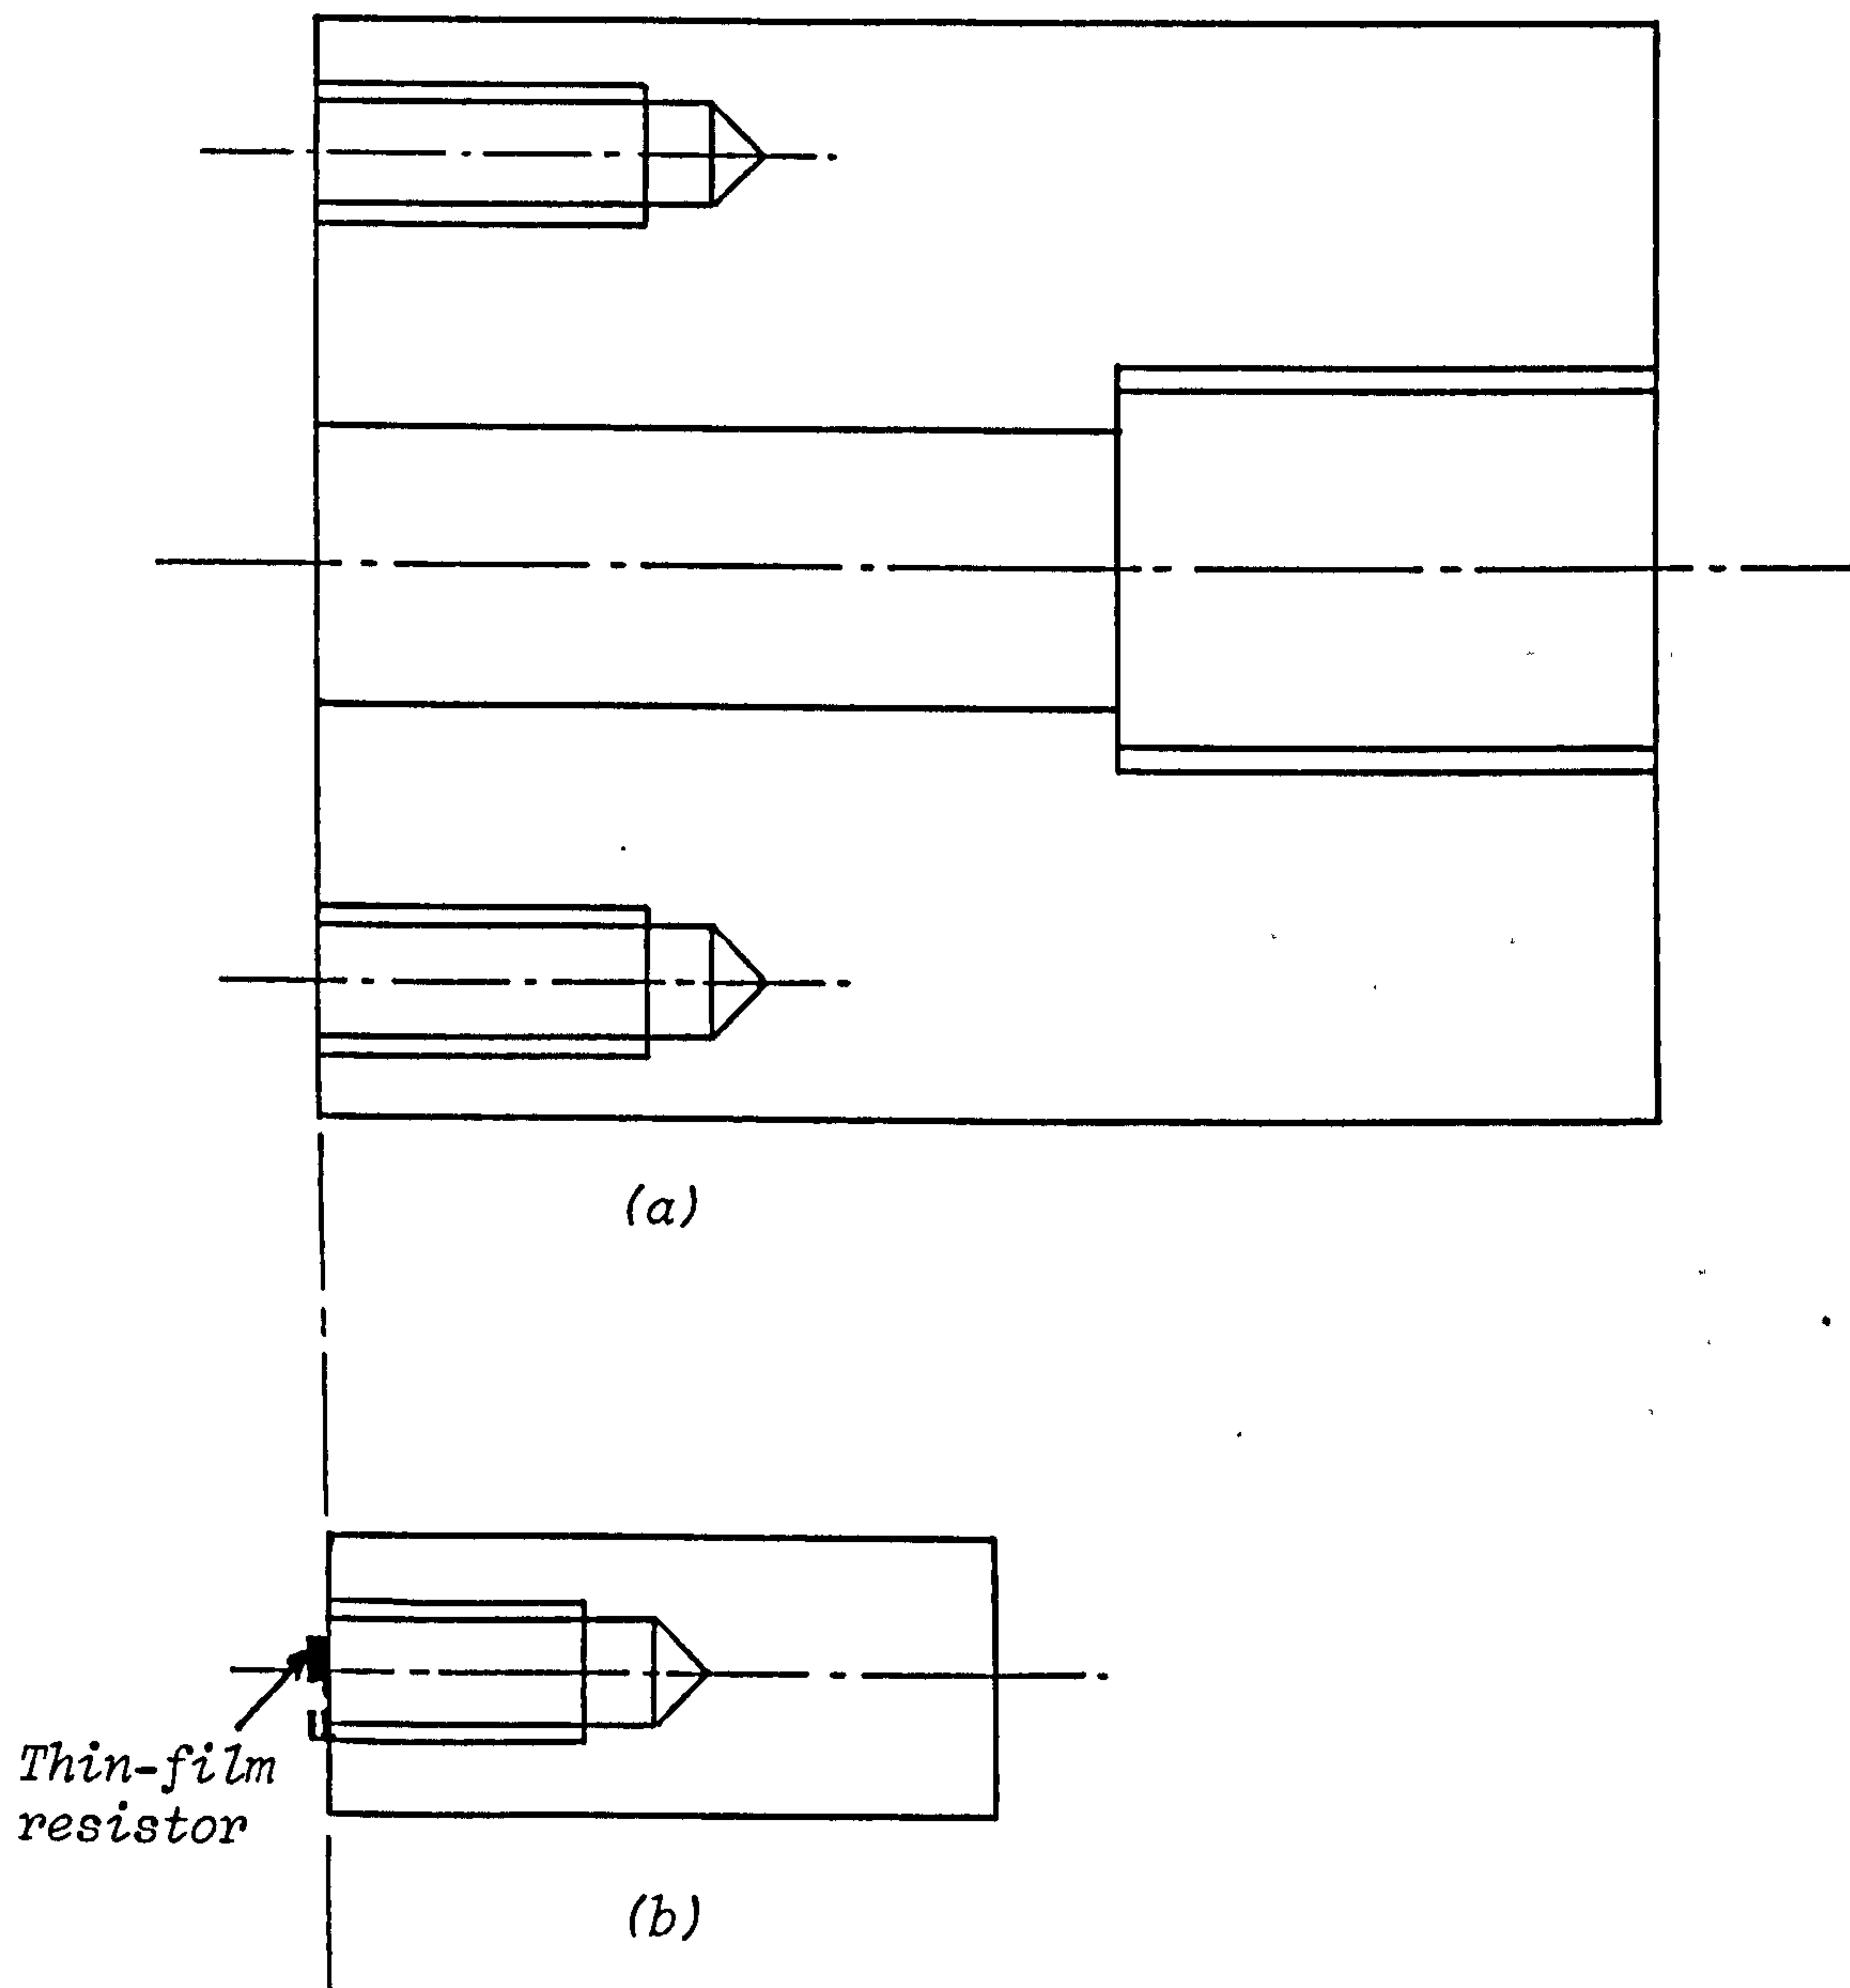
(a) The Thin-Film Resistor Co-axial Measuring-Jig.
